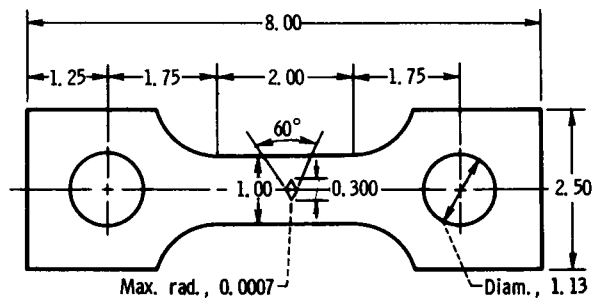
Notched-sheet fatigue specimen. (Dimensions are in inches.)
